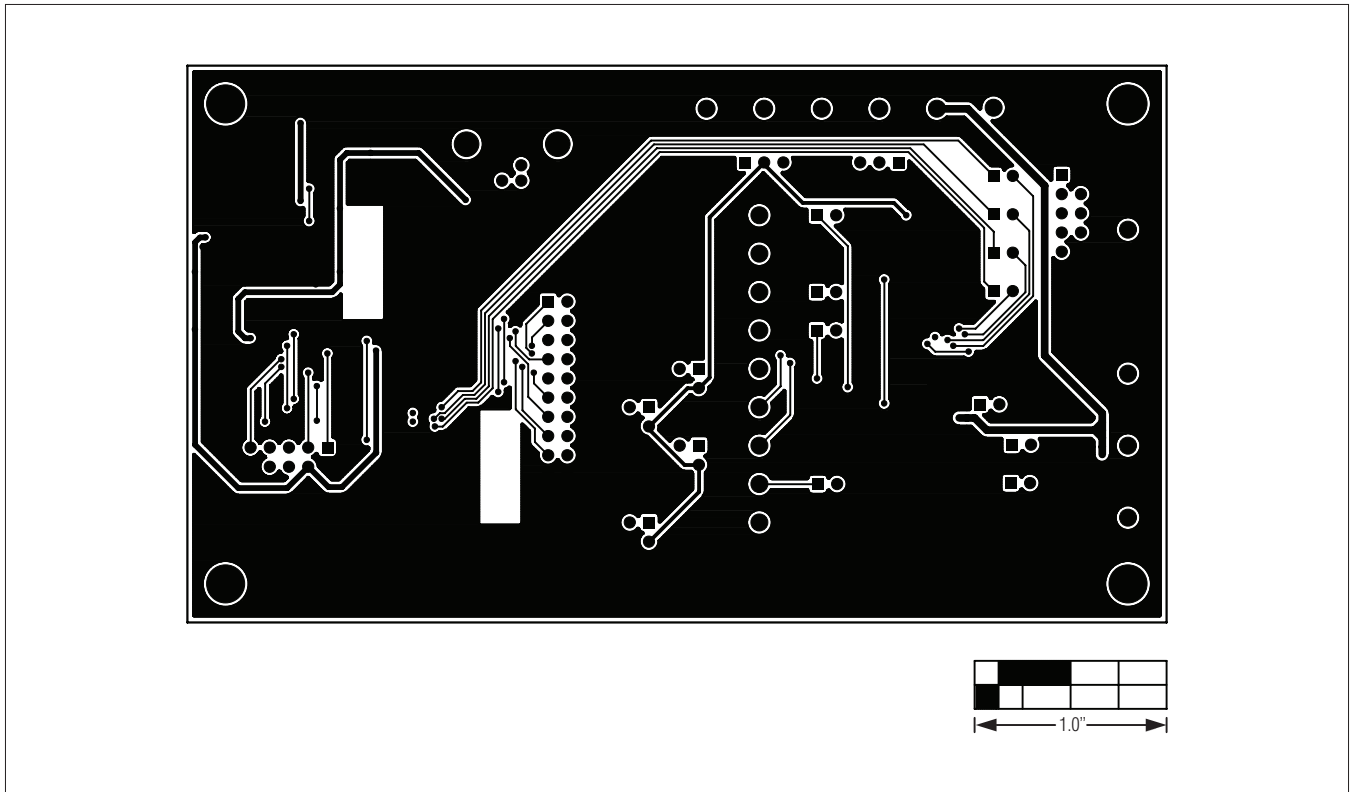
MAX14820 EV Kit PCB Layout—Solder Side
